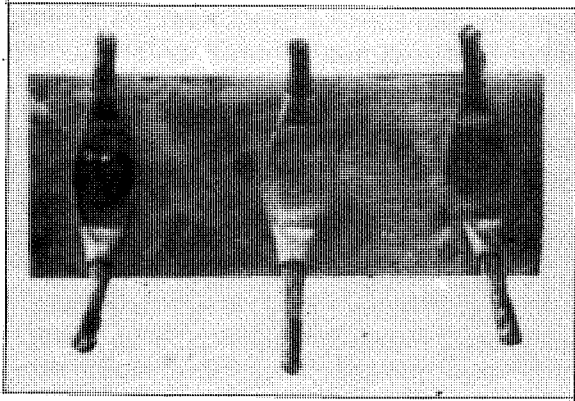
Explosive spot welds between dissimilar metals:
